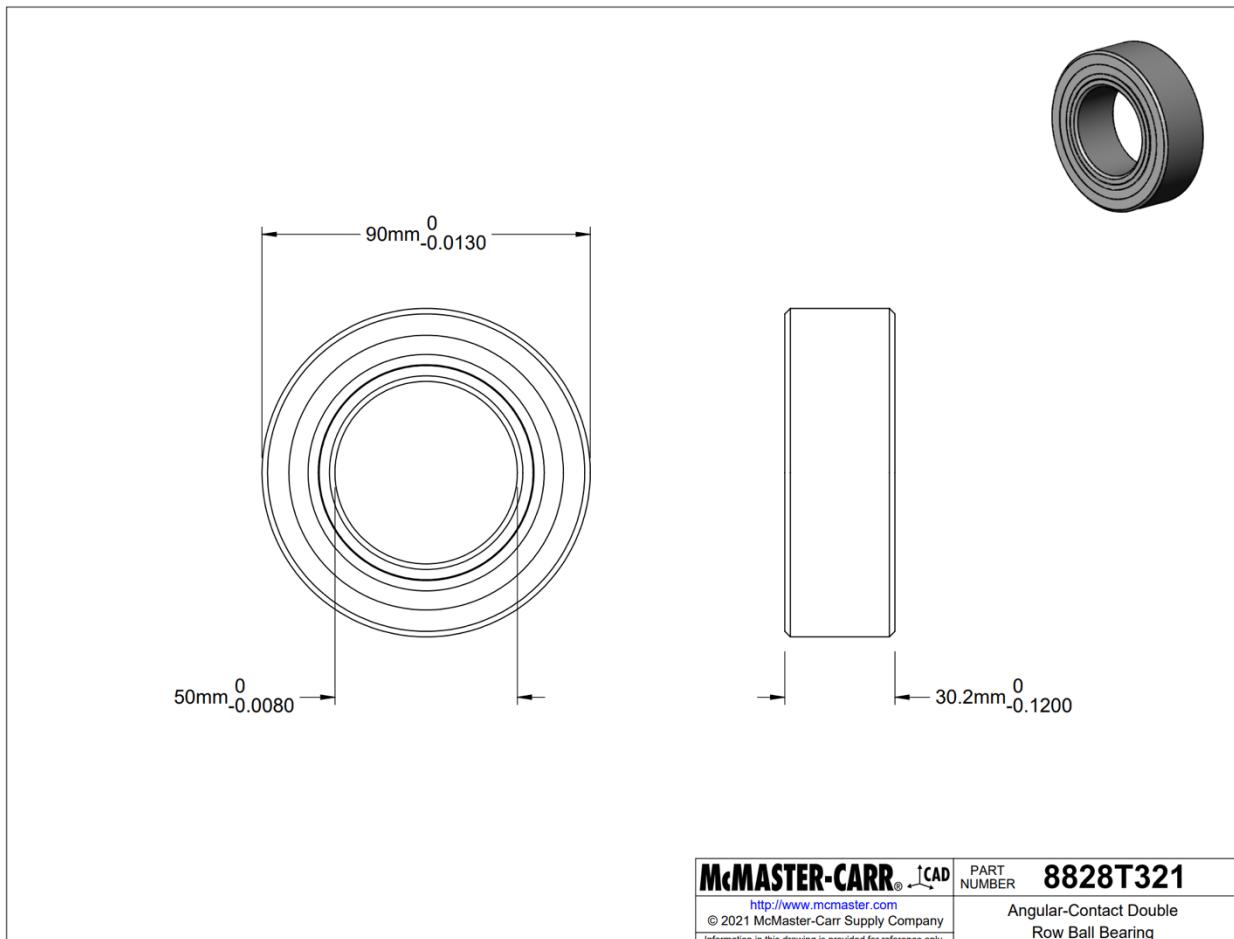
2D CAD drawing of the 8828T321 Ball Bearing
